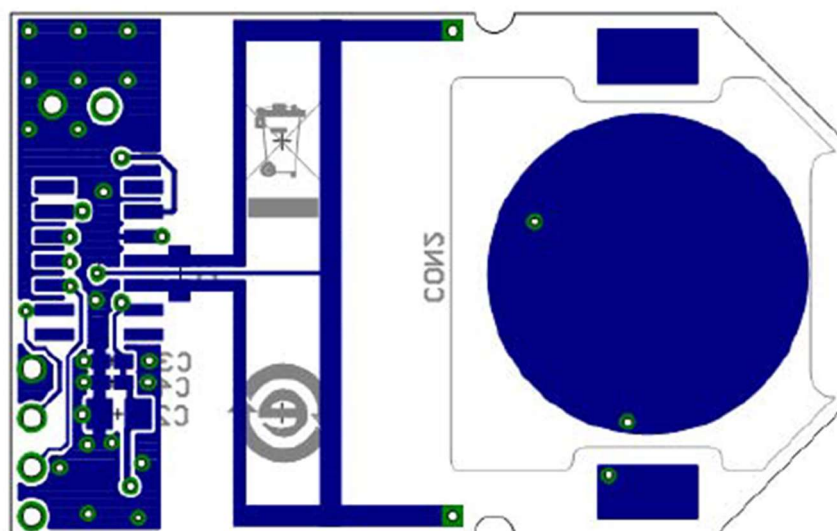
Antenna Bottom Layout with Final Outer Dimensions
